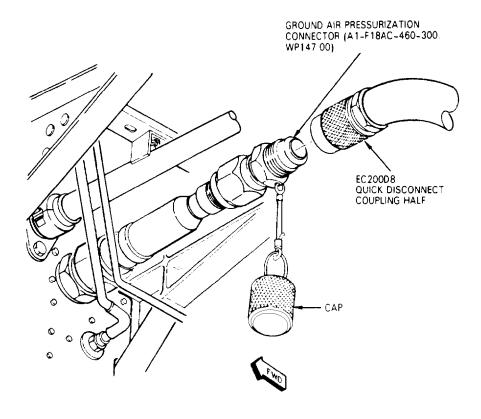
External Fuel System Test Component Locator (Sheet 1 of 2)
